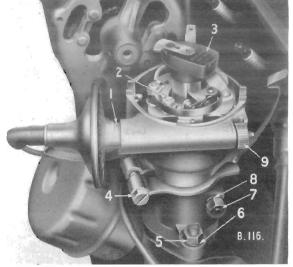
Distributor rotor arm position at T.D.C. Firing on No. 1 cylinder (Herald 1200, 12/50)
